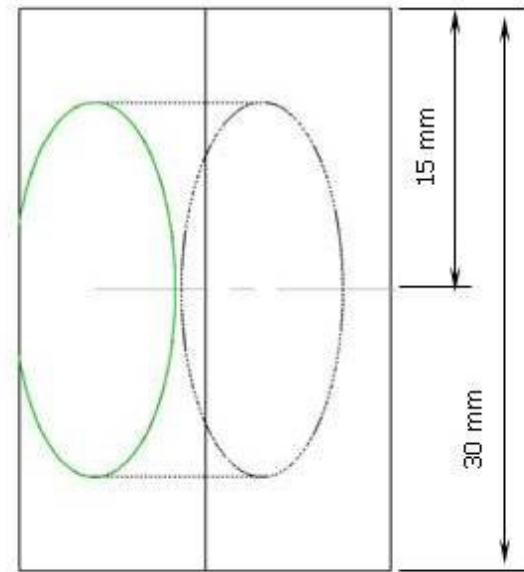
Technical Drawing of 45° Plexiglas wedge
